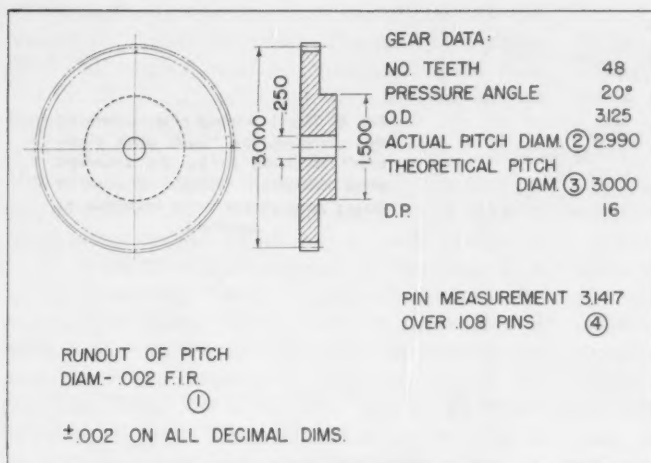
A confusion of nomenclature, absence of tolerances on essential dimensions, and errors in calculation put this drawing in the double-talk class.
